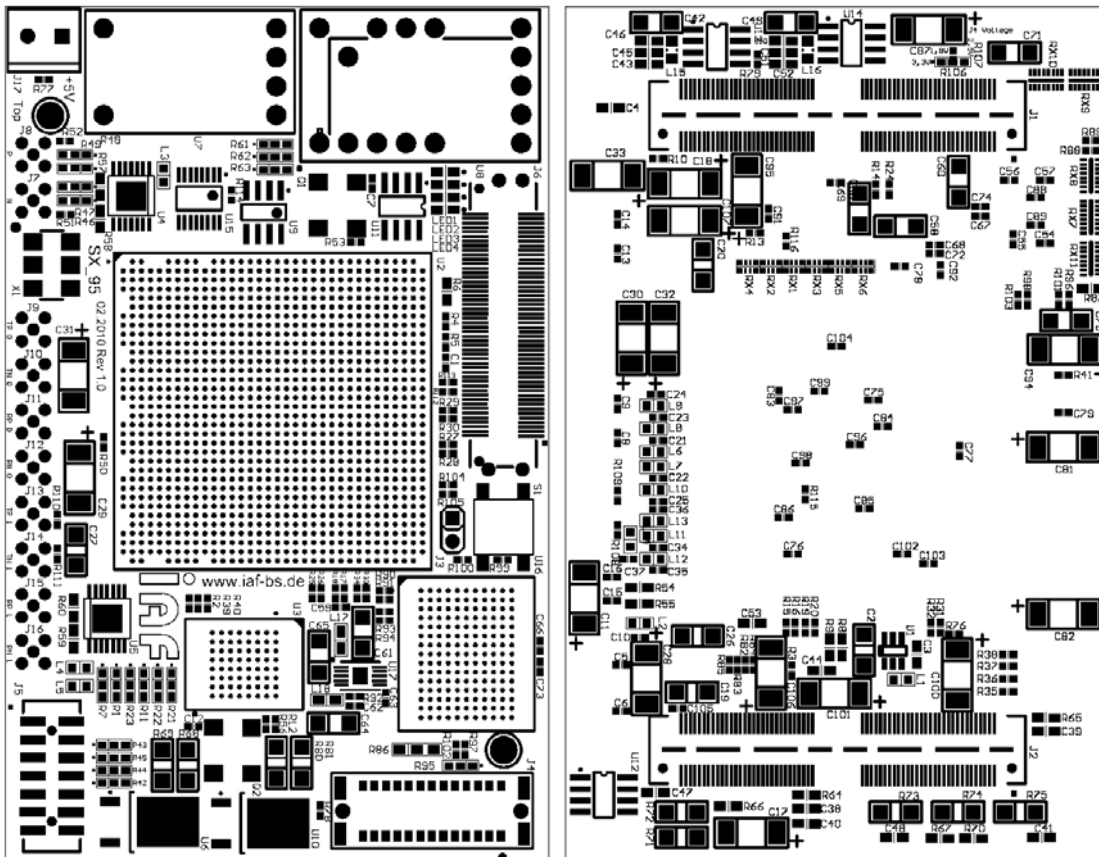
Top- and Bottom-Layout of Virtex5 SX95 Board
